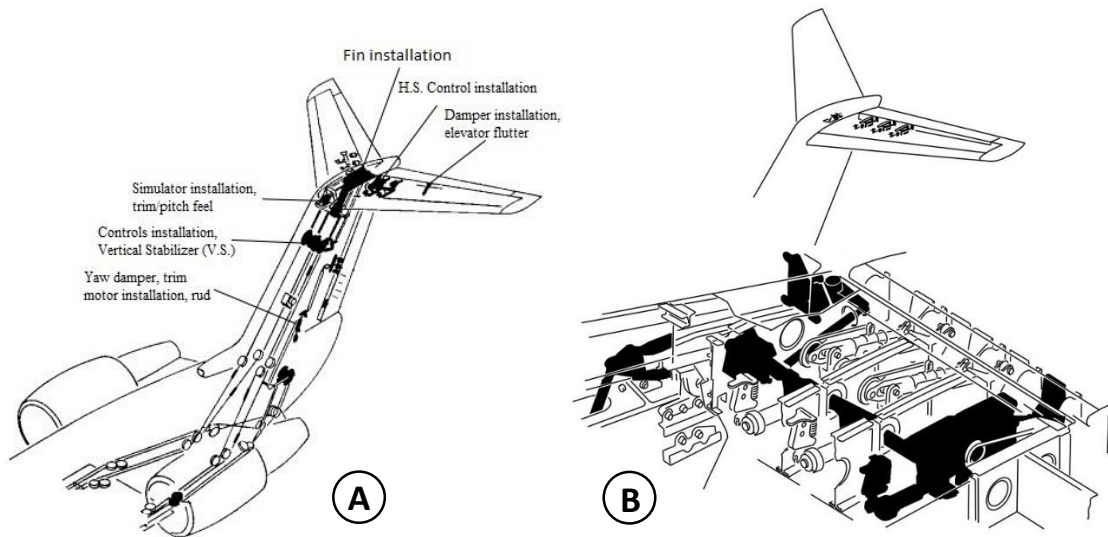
Accessing the H.S internal elements during disassembly prior to the post-disassembly and recycling stages to reduce the impurities; (a) Damper installation and elevator flutter; (b) Mechanical path control element
